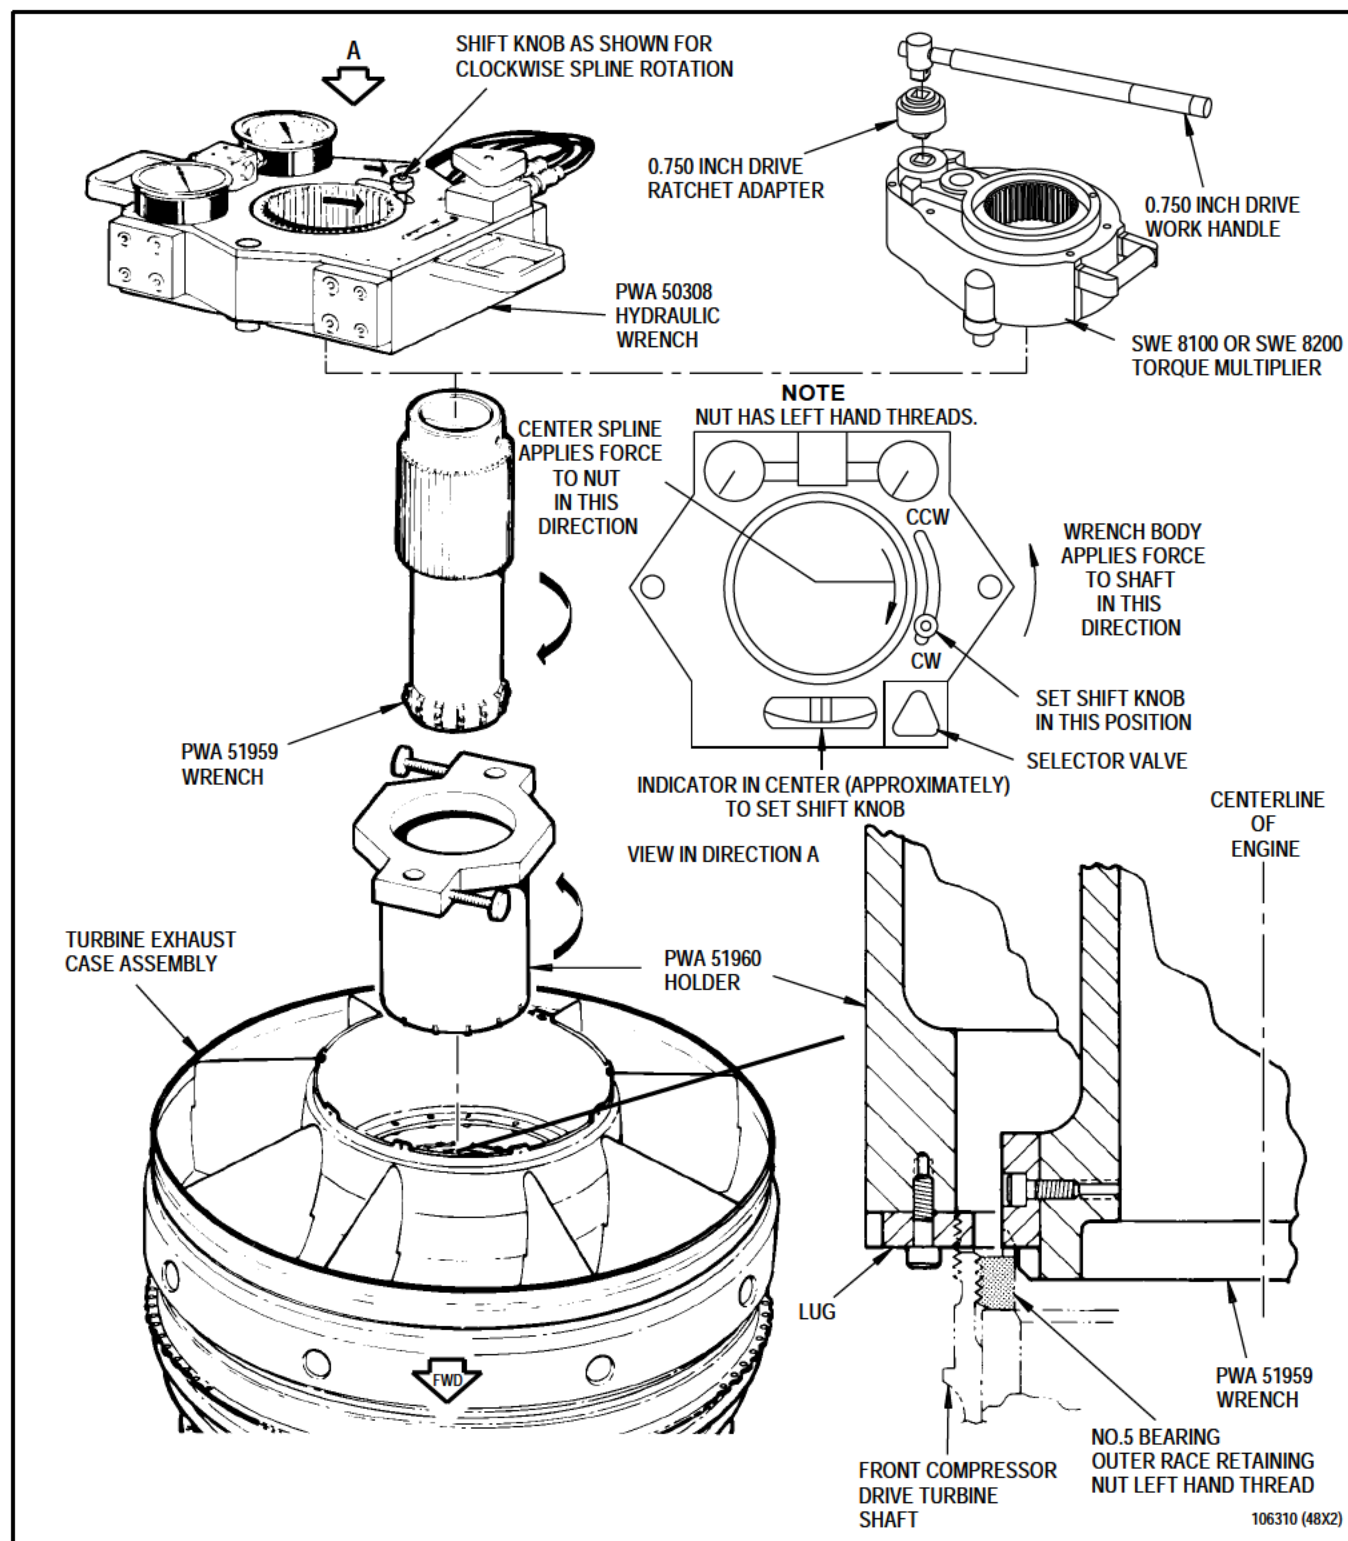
No. 5 Bearing Outer Race Retaining Nut - Removal
